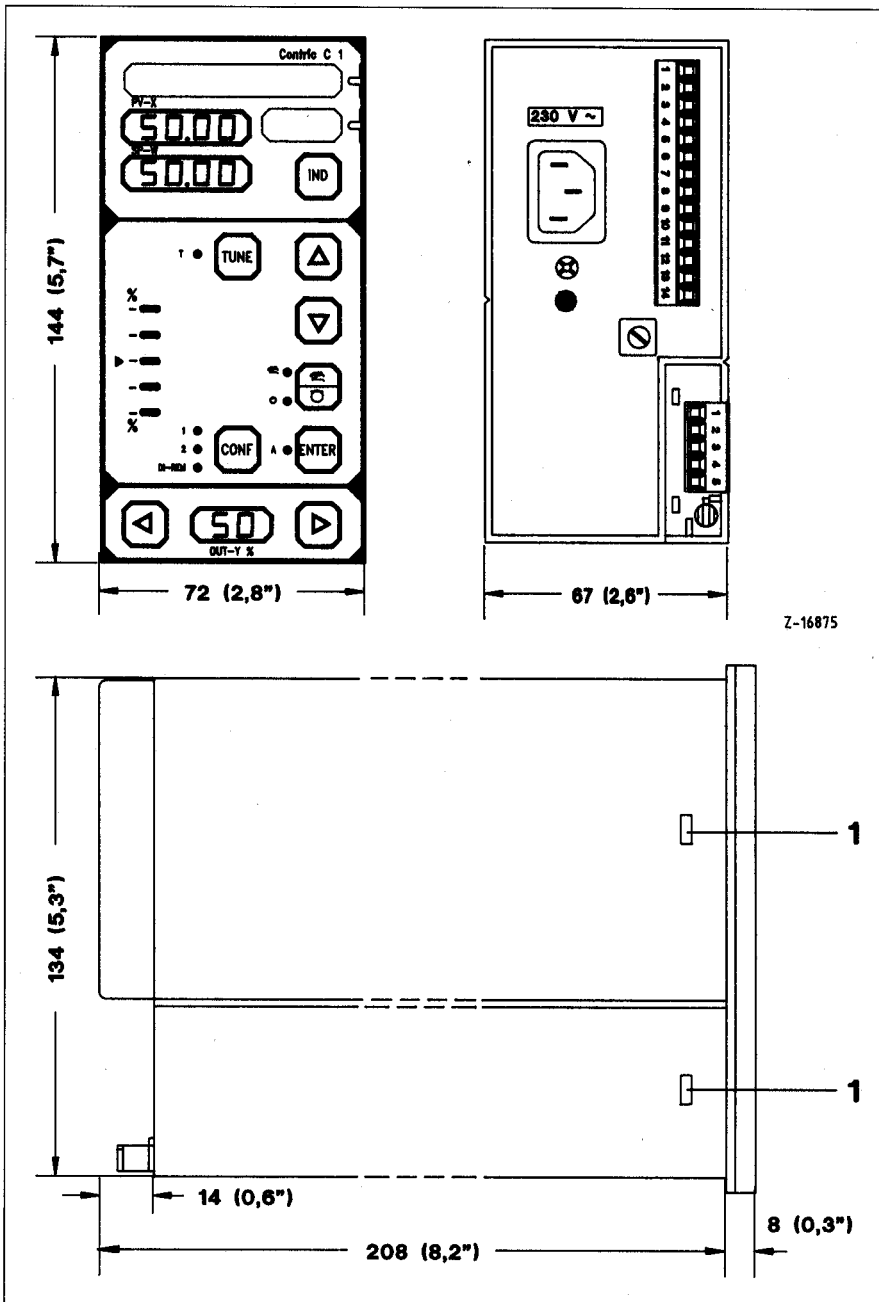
Dimensional drawing (dimensions in mm with corresponding values in inches in brackets)
